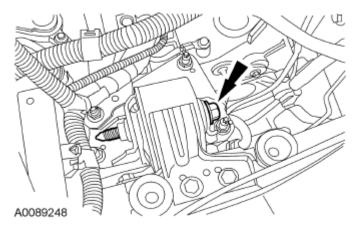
Identifying Battery Cable Nut And Starter Solenoid Terminal Nut Courtesy of FORD MOTOR CO.
